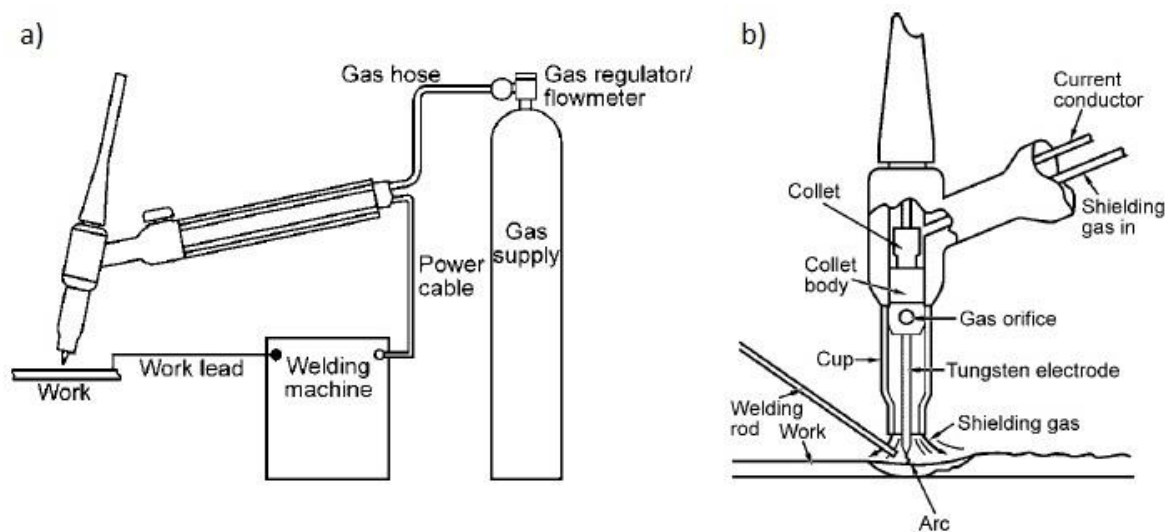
TIG welding: a) overall process schematic; b) enlarged welding area (Lienert et al. 2011, p. 344).
